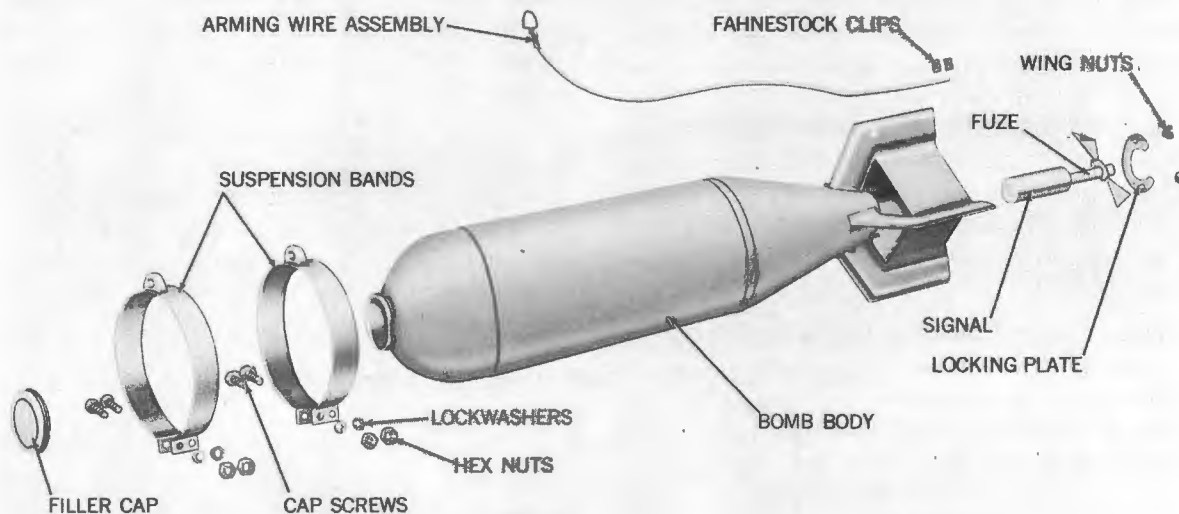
100-lb Practice Bomb Mk 15 Mod 3, Exploded View.
